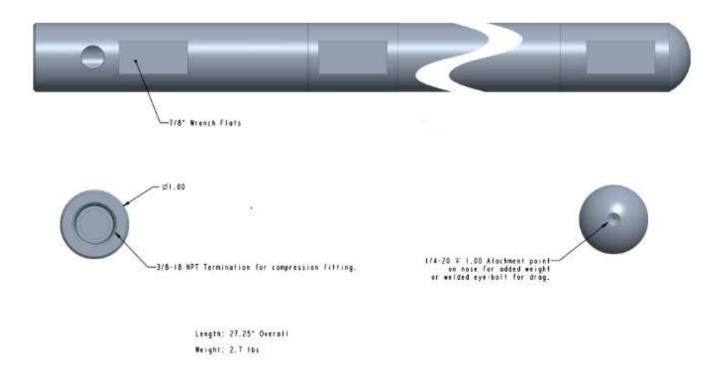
Silixa's high-pressure bottom hole assembly (BHA).
